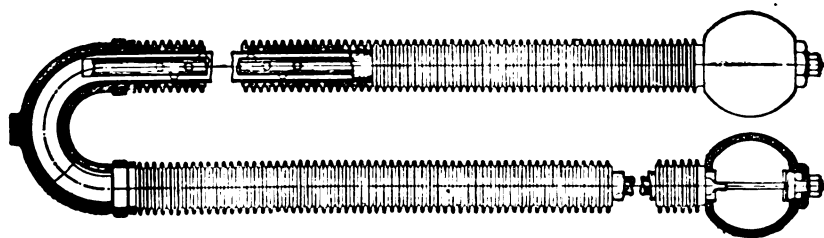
TYPICAL FOSTER RETURN BEND ELEMENT AND CONNECTING HEADERS
